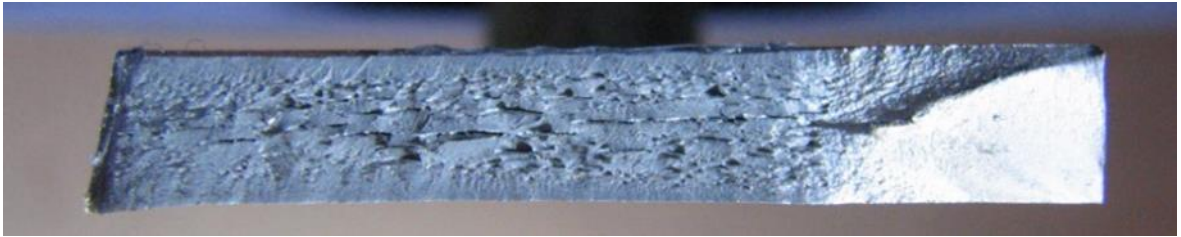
Fracture surface of the fiber laser cut of S1100 Plus.
